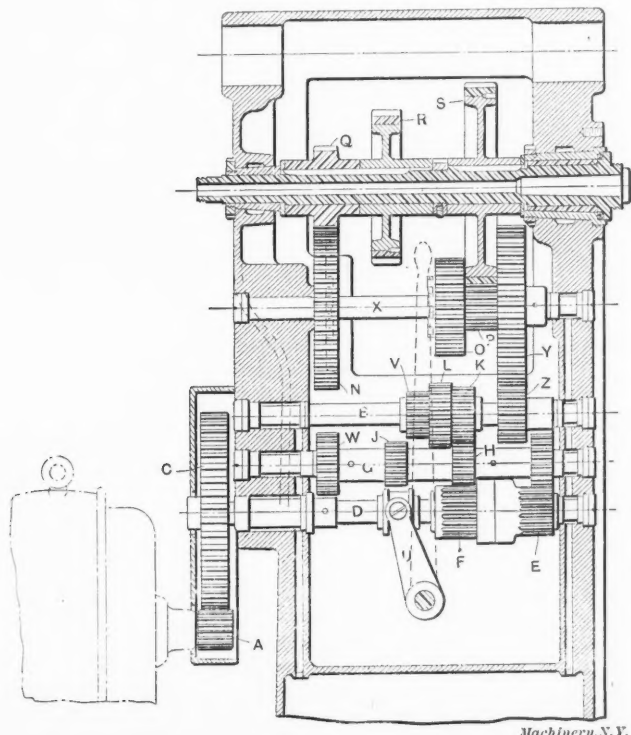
Diagram of Spindle Drive of Milling Machine shown in Fig. 9.
